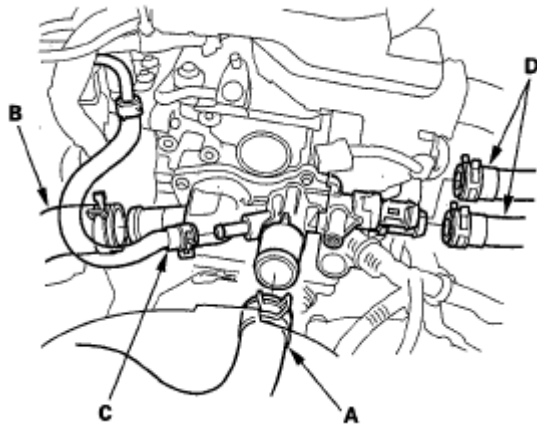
Locating Upper Radiator Hose, Lower Radiator Hose, Water Bypass Hose & Heater Hoses
